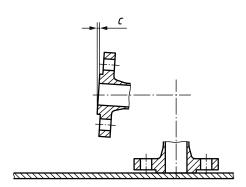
Tolerances on parallelism and perpendicularity
